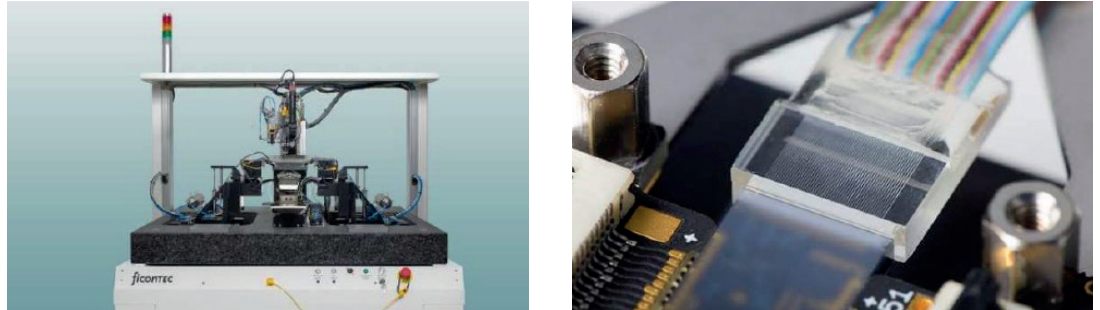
/14: Photonic assembly and alignment equipment (Source: ficonTEC).
